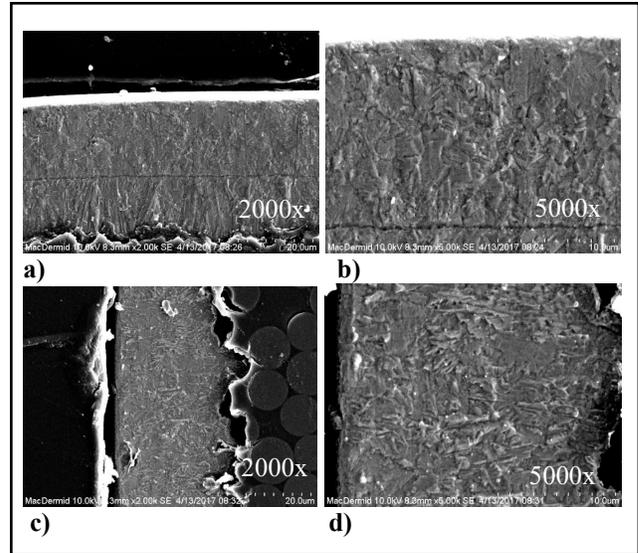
SEM. a) and b) Cross Section pictures of the Surface around 0.20 mm TH; b) and c) Cross Section pictures of copper plated inside the TH, on the hole walls. Panel Plated at 20 ASF.
